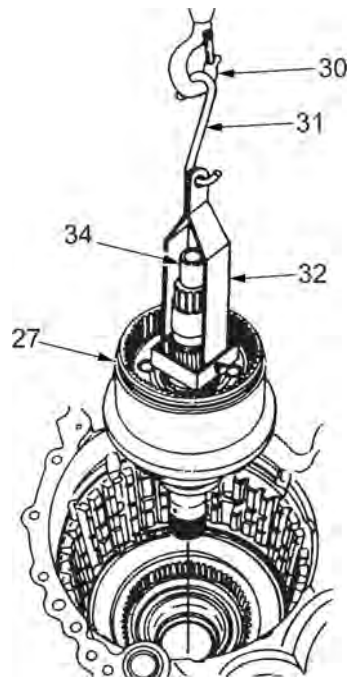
Range Input Shaft and Center Carrier Assembly Removal.
